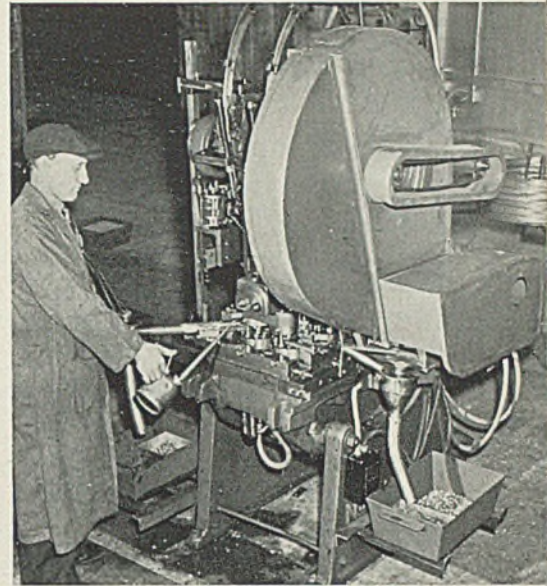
Latest model of Bell duplex rivet making machine. Note wire feeds from coils at back; two sets of dies; two discharge chutes for finished rivets; etc
